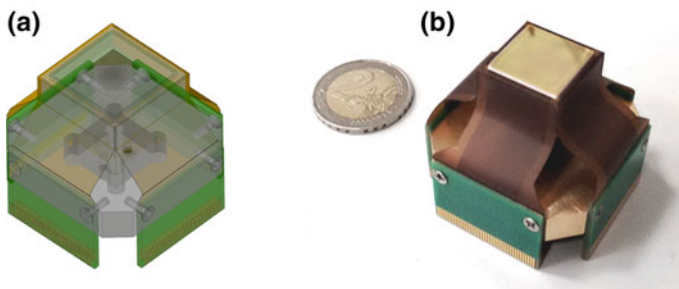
a 3D mechanical model of the spiral probe head. b Photo of a dual-linear (crisscross) array microfabricated and packed using CMUT RFP
